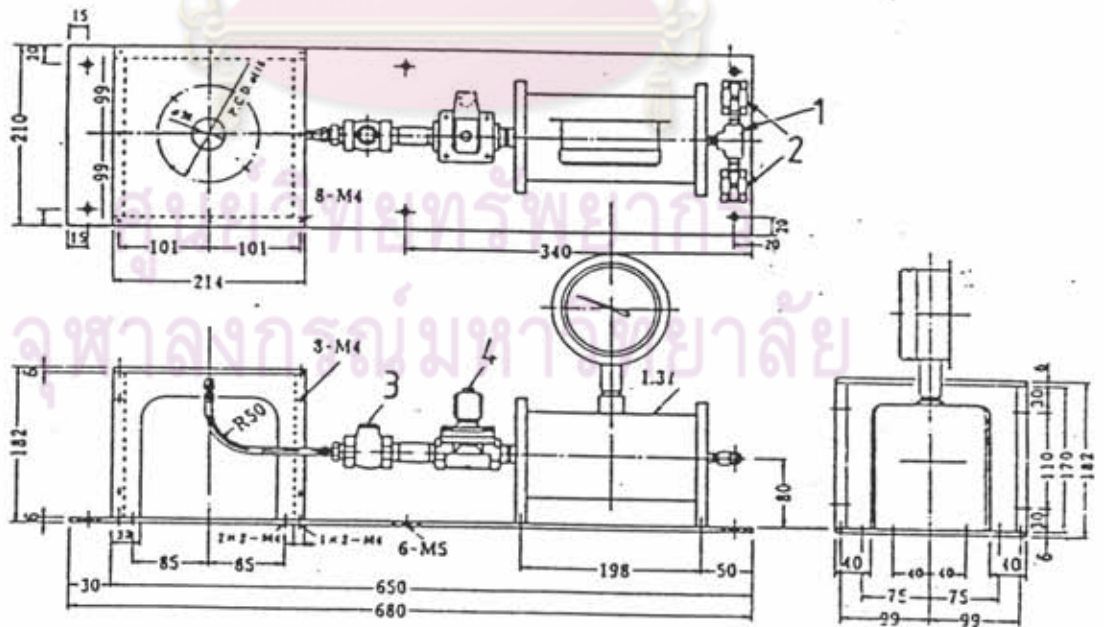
COMPRESSED AIR SUPPLY SECTION
